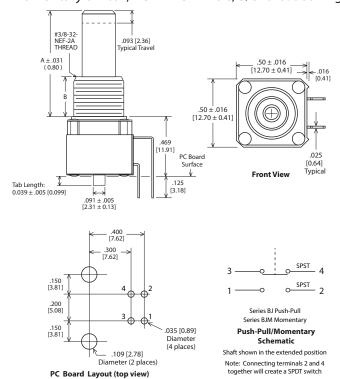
A18: A-18 Single Potentiometer or RS, PC Pin Terminals, 3/8" Dia. Bushing
